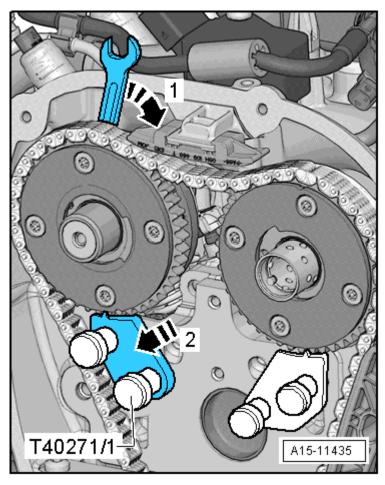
Turn Exhaust Camshaft In Direction Of Arrow
